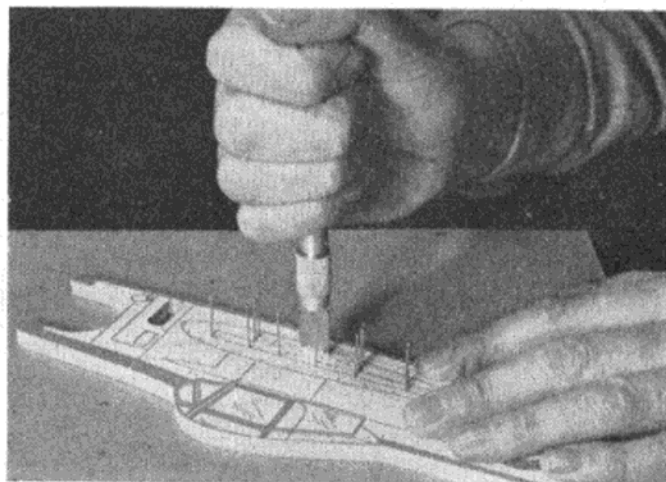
Cut wing slot carefully, making sure that the tool is held perfectly upright.
